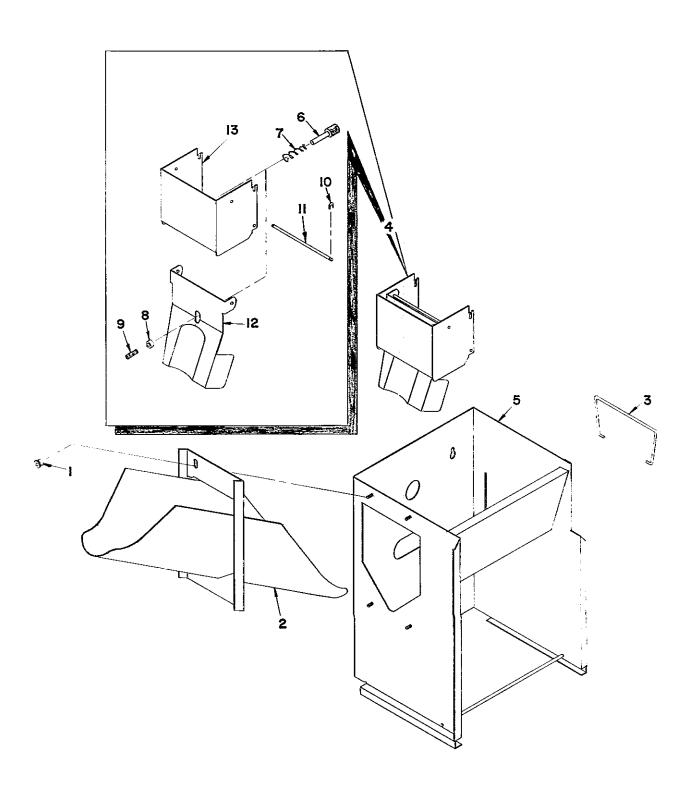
CUP HOUSING ASSEMBLY COMPLETE
